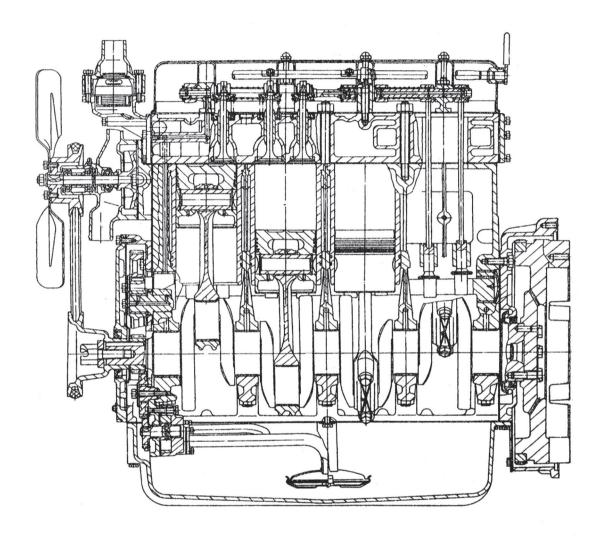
Longitudinal and sectional drawing for 495、4100、4102 diesel engine
